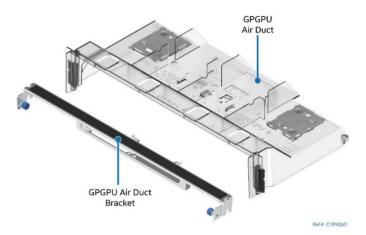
Optional GPGPU Air Duct for 1U Height Processor Heat Sink and GPGPU Add-In Cards
